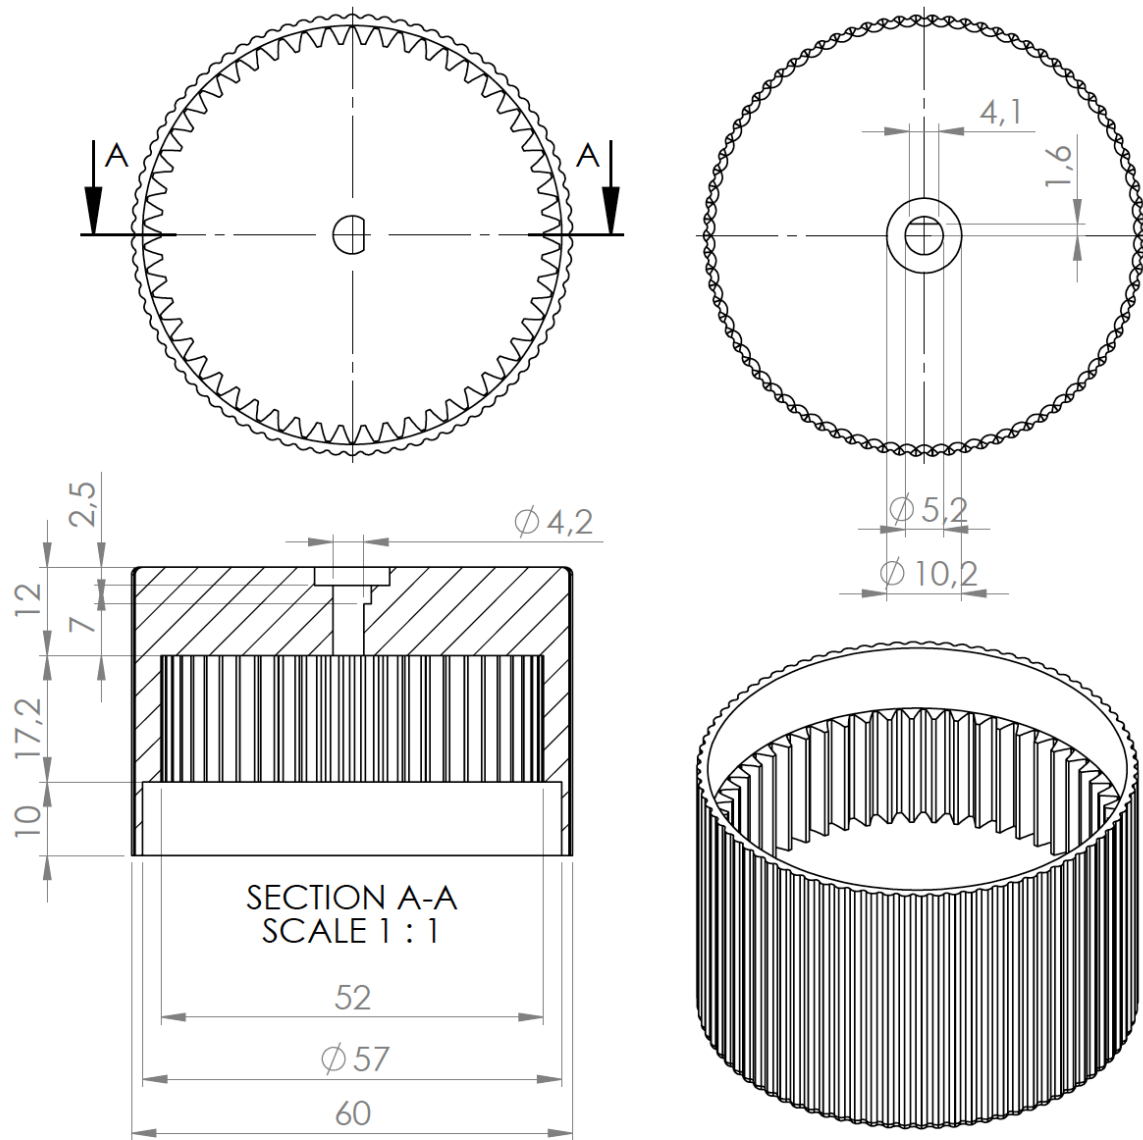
Selection of component views and dimensions (mm), C9 - Internal gear 2
